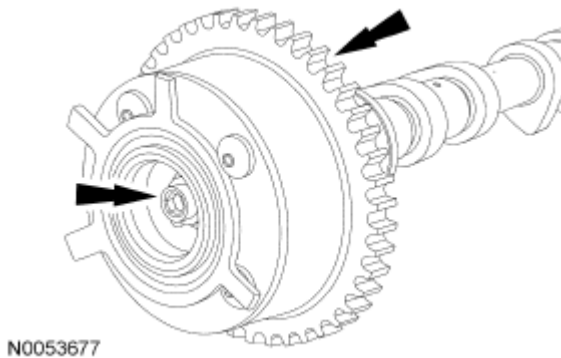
Locating Variable Camshaft Timing Actuators Onto Intake Camshafts
